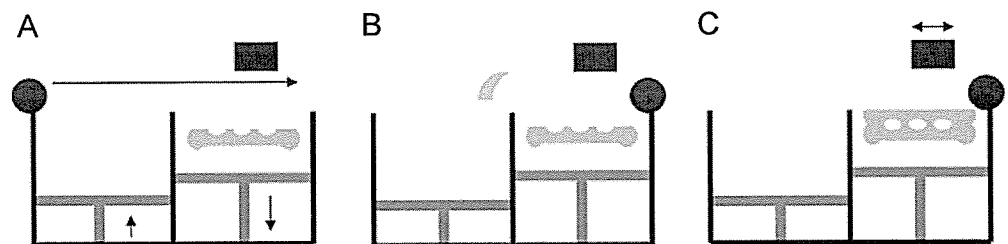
A–C. The ink-jet printing process. Ink-jet printing is a layer manufacturing technology that fabricates three-dimensional models from computer-aided design (CAD) data. The process consists of forming layers by using a printer-like device to distribute an adhesive to bond the surface of a powder into the desired shape. A A measured quantity of ceramic powder is first dispensed from a supply chamber on the *left* by the incremental upward movement of the piston. B A roller then distributes and compresses the powder at the top of the fabrication chamber on the *right*. C The jetting head subsequently deposits a liquid adhesive in a two-dimensional pattern onto the layer of powder, bonding the areas into the desired shape. These steps are repeated until the whole part is formed within the fabrication chamber
